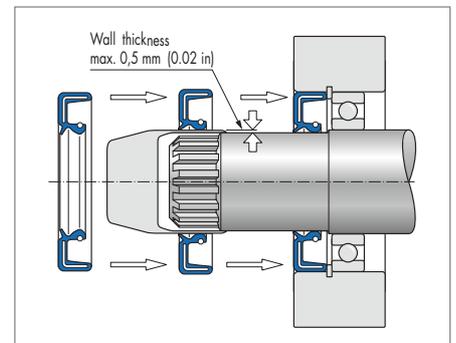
Installation over a shaft with a keyway (also for a sharp-edged shoulder on shaft)
